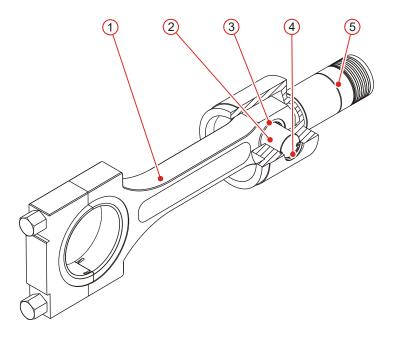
Gudgeon pin and gudgeon pin bearing (example)
